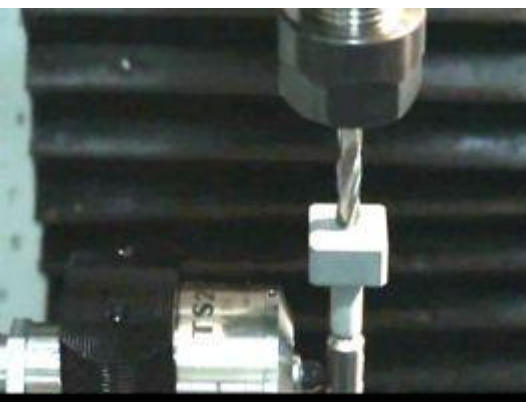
Mill no. 3 measurement using the TS27R instrument
